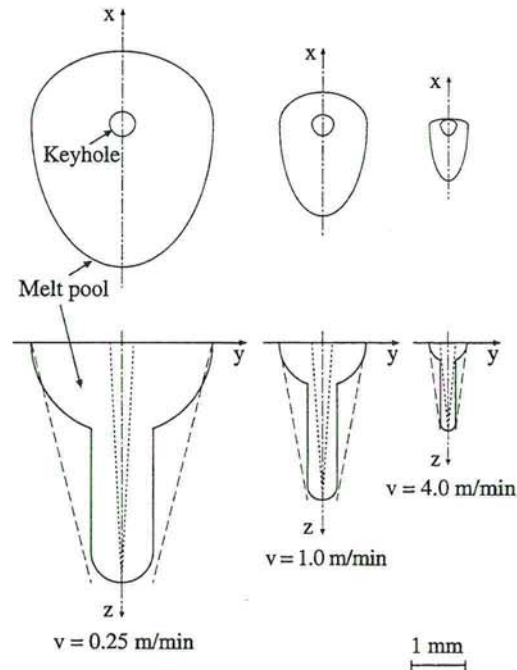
Theoretical weld pool shapes at different welding speeds using the model described in the paper.
